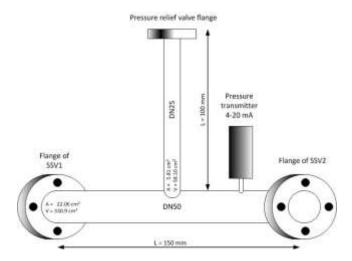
Pressure Transmitter between SSV1, SSV2 and Pressure Relief Valve
